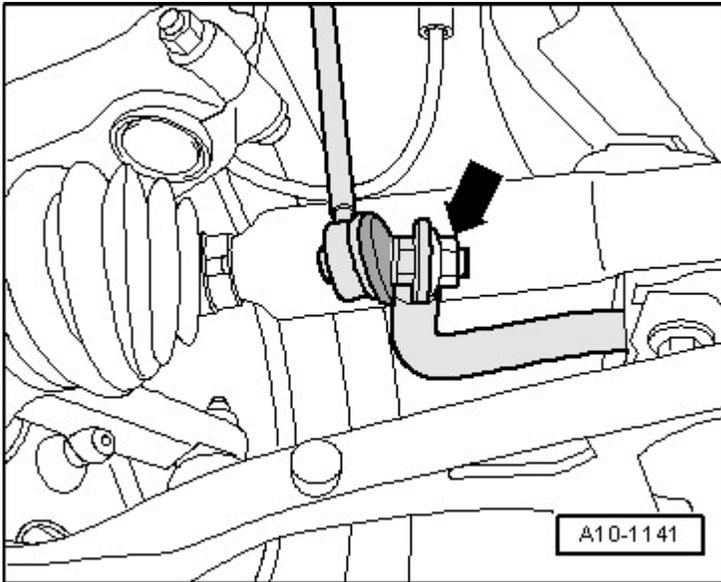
Identifying Left And Right Coupling Rod Nuts
